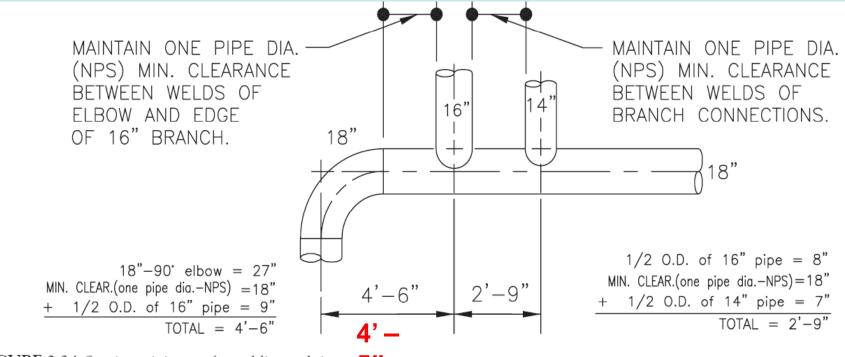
Spacing minimums for welding stub-ins. 5"
